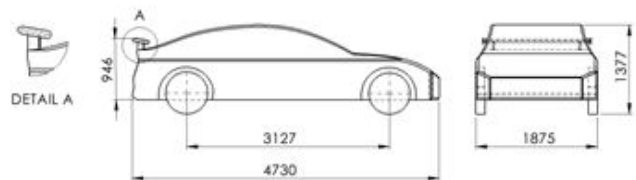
Dimensional representation of the straight wing spoiler form with CAD Model B.
